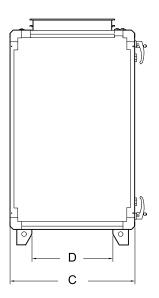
Dimension (mm) Topvex TX03-04 (drawn as left hand unit)
